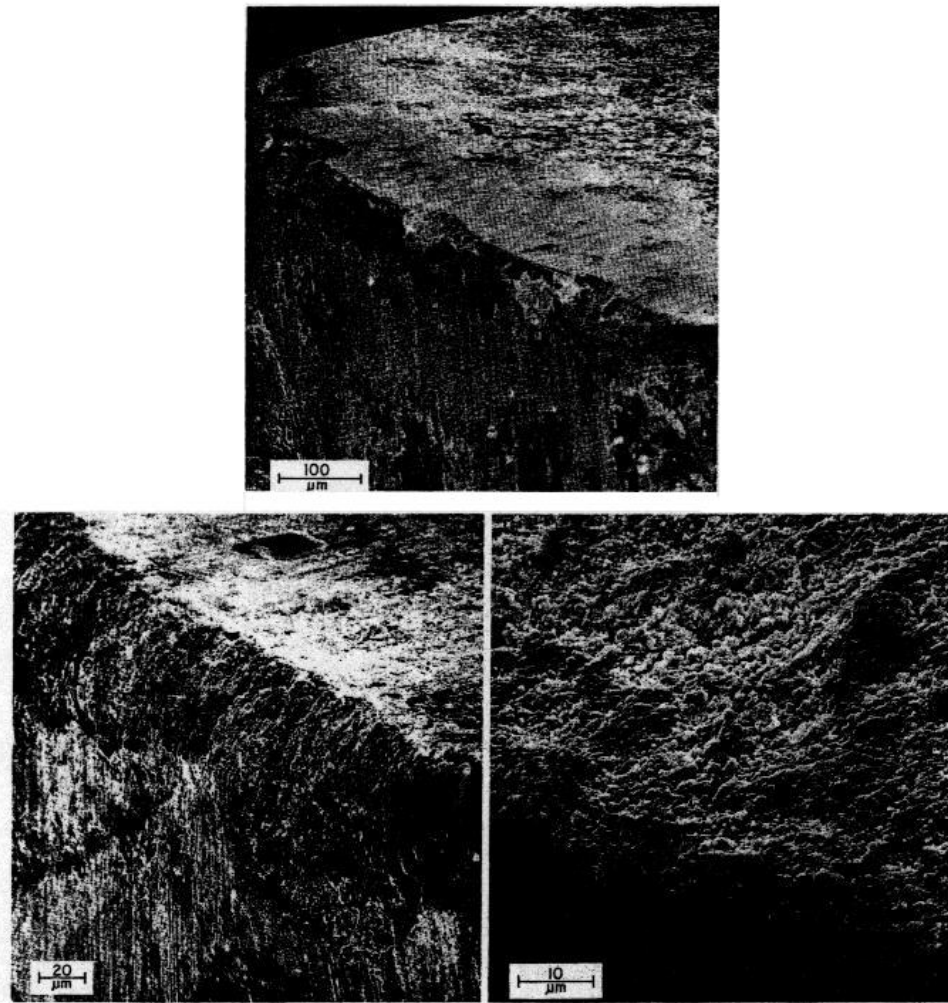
(Top) Tungsten carbide cutting edges showing chemical corrosive pitting in and adjacent to chipped areas. (Bottom left) Same cutting edge at higher magnification. (Bottom right) at still higher magnification, nearly loose grain of tungsten carbide can be seen; the cobalt binder has been eroded.
